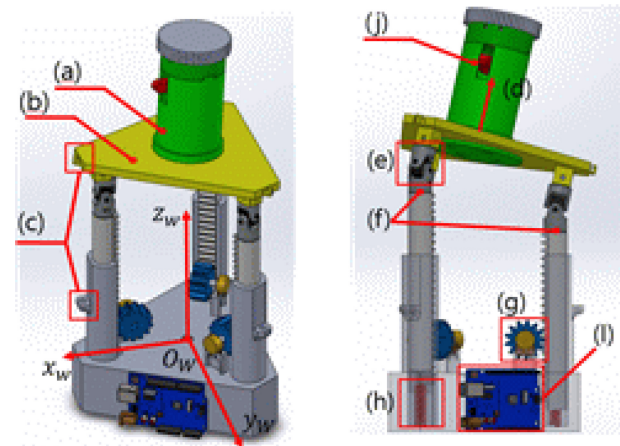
Design of developed controller using parallel mechanism: (a) Handle for grip, (b) Plate for maneuver, (c) Rubber band connector, (d) Normal vector of plate, (e) Universal joint, (f) End point of rack gear, (g) Pinion gear connected to potentiometer, (h) Spring, (i) Microcontroller board (Arduino Uno), and (j) Wheel for throttle control
